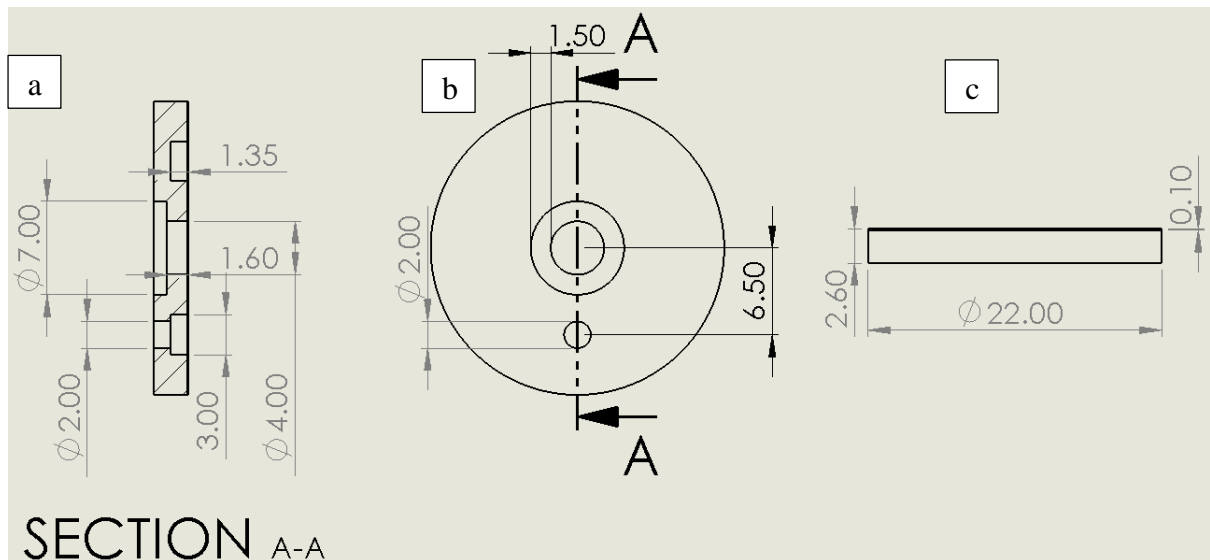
From left to right: a) cross-sectional b) bottom c) side view of the soft valves' bottom piece, respectively.
